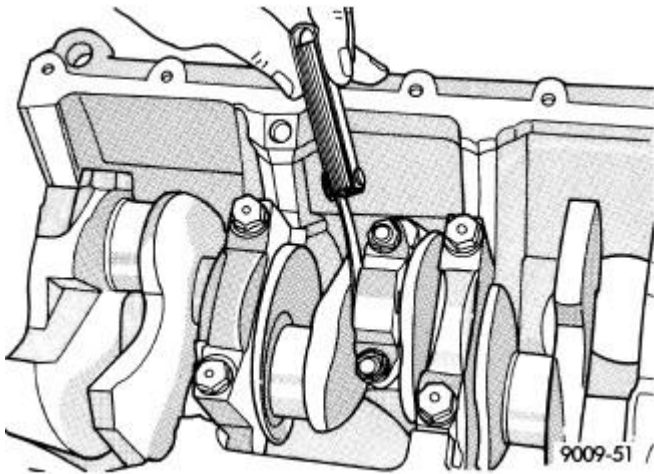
Measuring Gap Between Connecting Rod & Crankshaft Journal Flange
